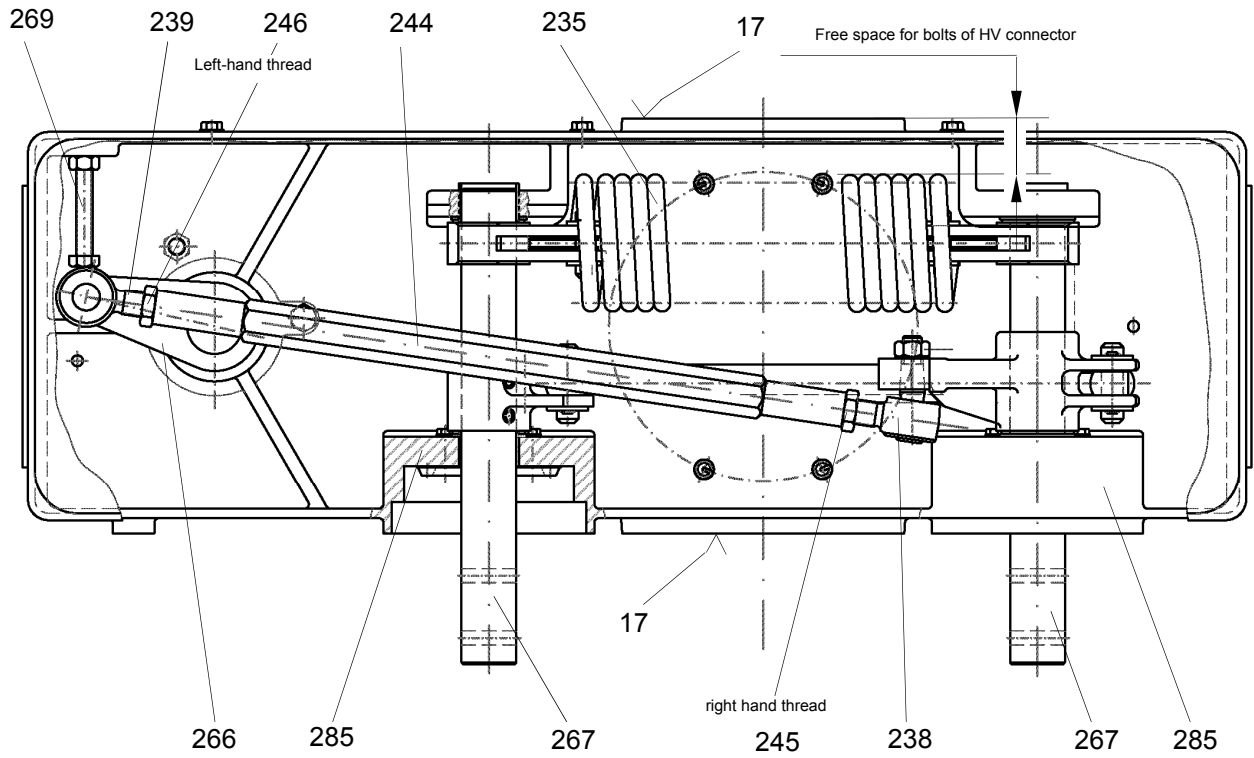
Gear box 224, sectional drawing: plan view (switching position CLOSED)
